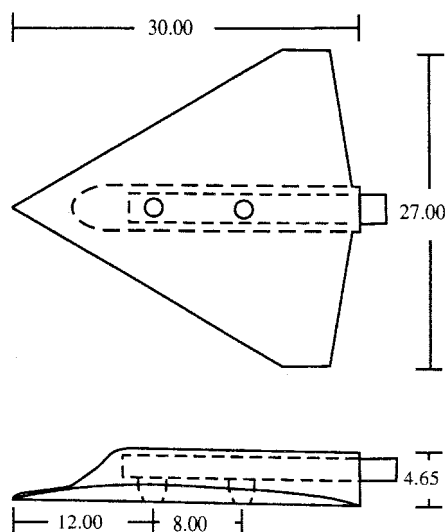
STOVL model geometry. Top and side views. Dimensions are in inches.
